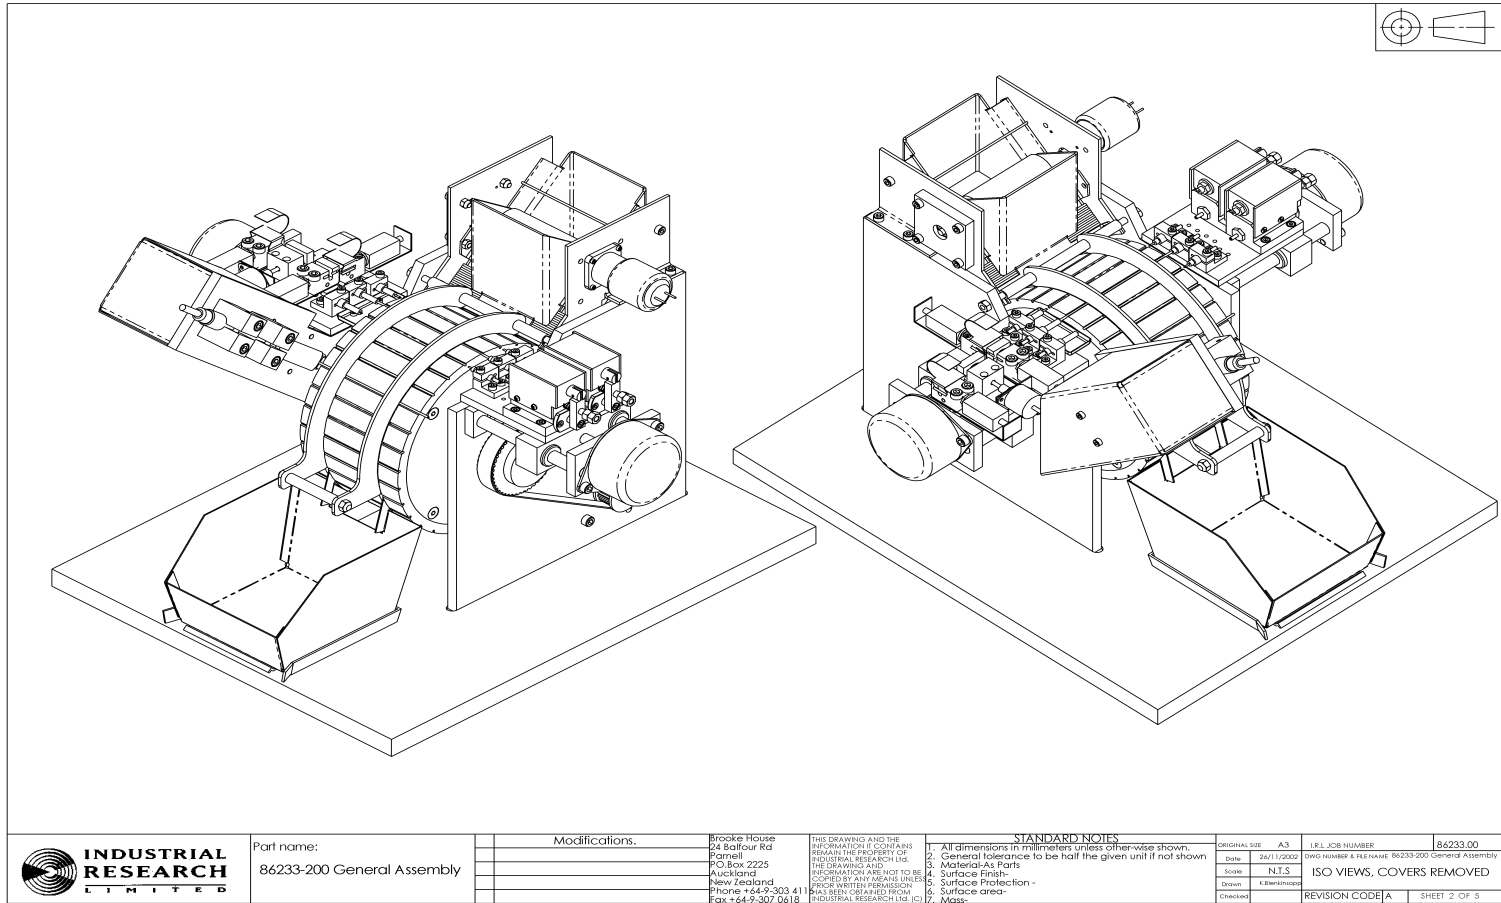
KNEX machine general assembly, left and right hand views, covers removed
